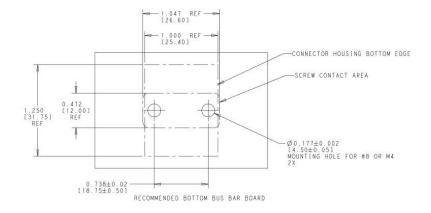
Bottom Screw-Mounting Bus Bar Board Layout View of P/N: 1643903-*.
